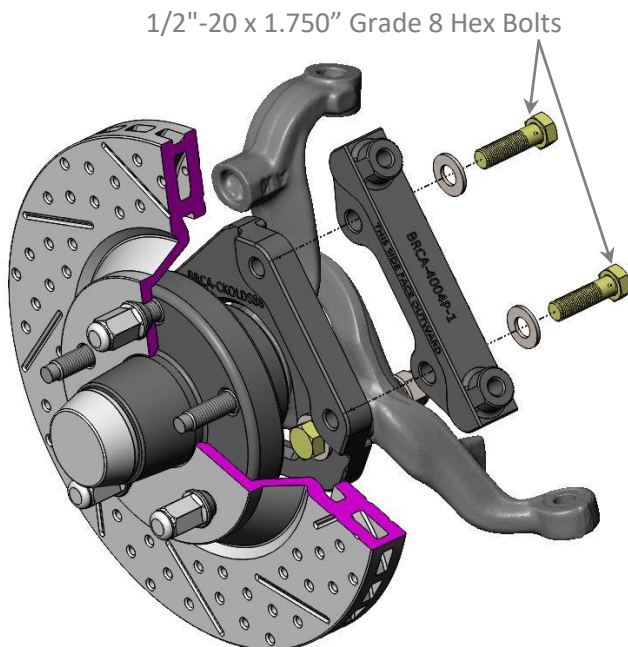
Primary Caliper Bracket Installation (LH Shown)
